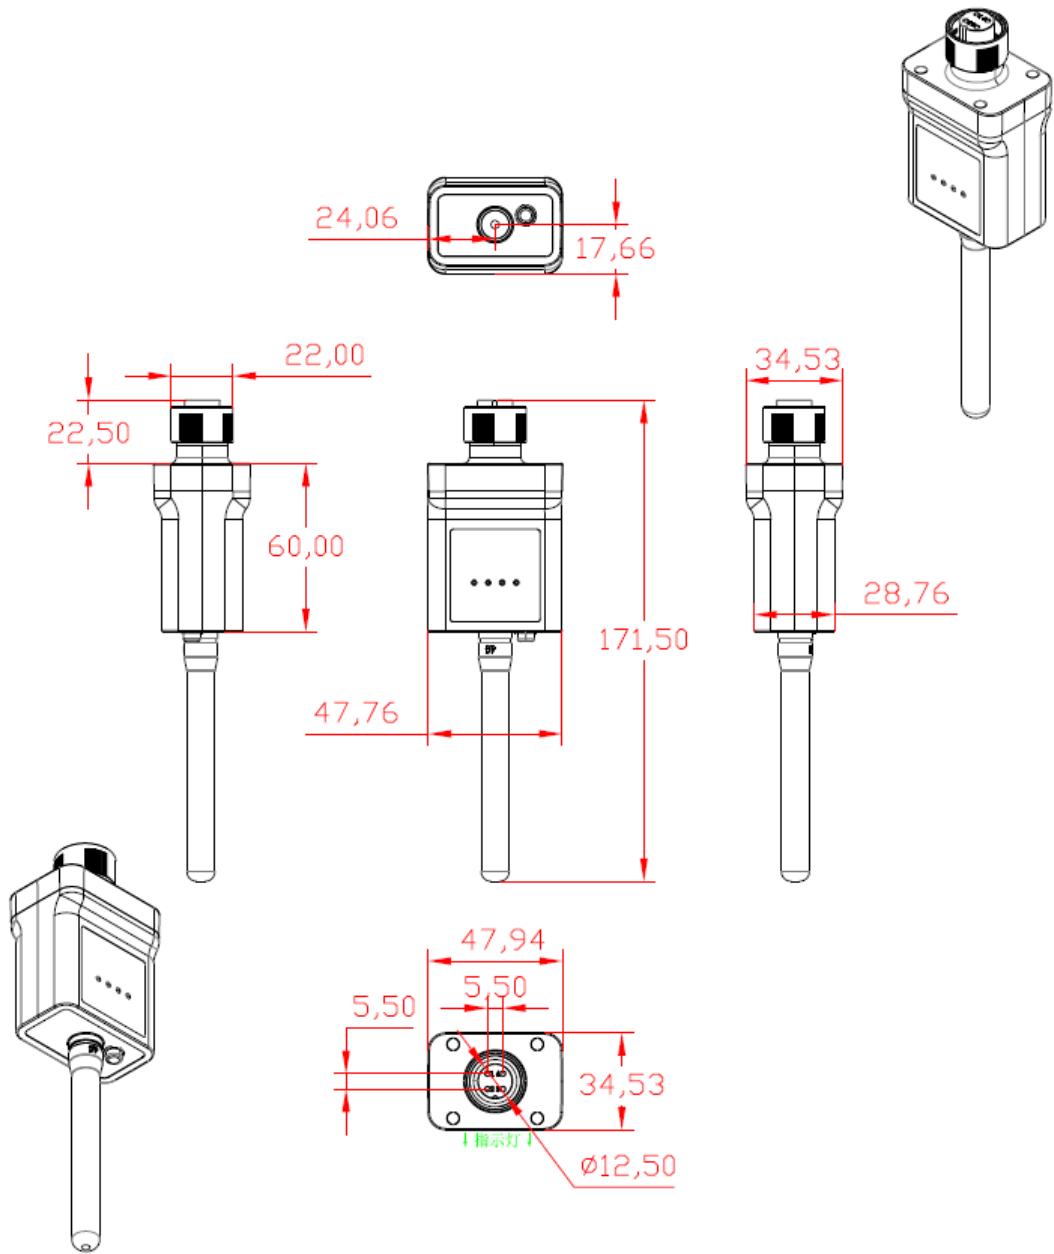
Solar Plug-SGB1-27 Mechanical Dimensions
